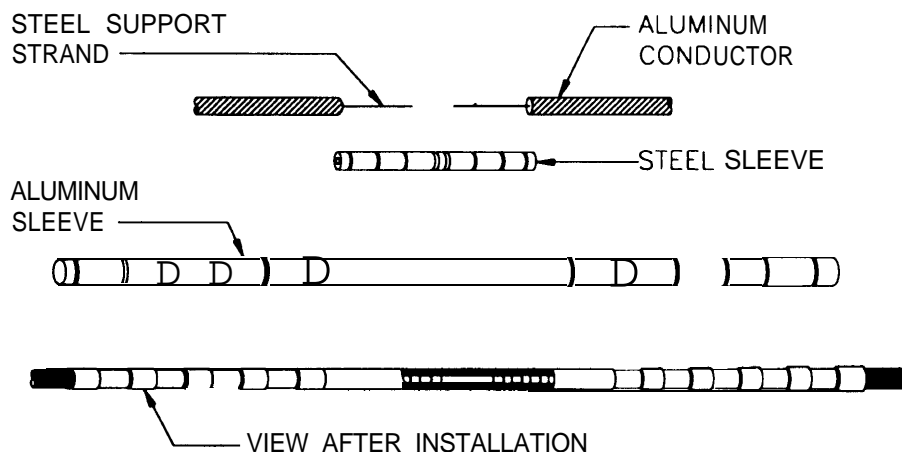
Double-sleeve compression splice (Courtesy of BURNDY Electrical)
